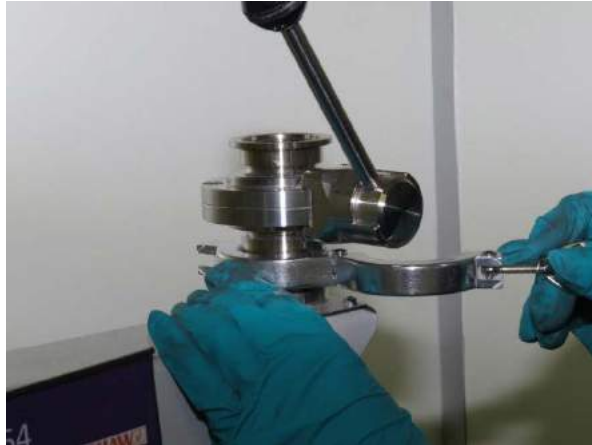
Attach the upper valve (S1) with clamp (SL2)
